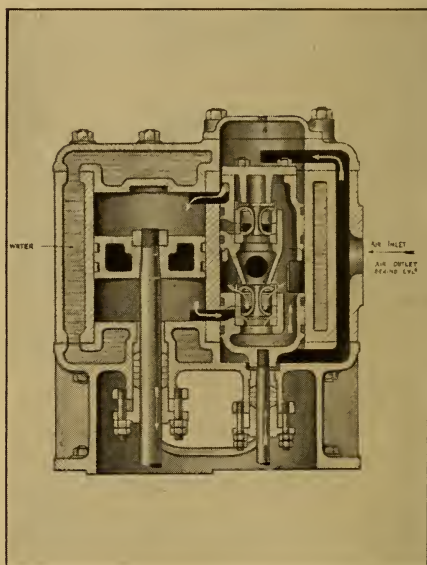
MATTHEWSON VALVE GEAR FOR HIGH-SPEED COMPOUND COMPRESSOR. TILGHMAN'S PATENT SAND BLAST COMPANY, LTD., MANCHESTER
